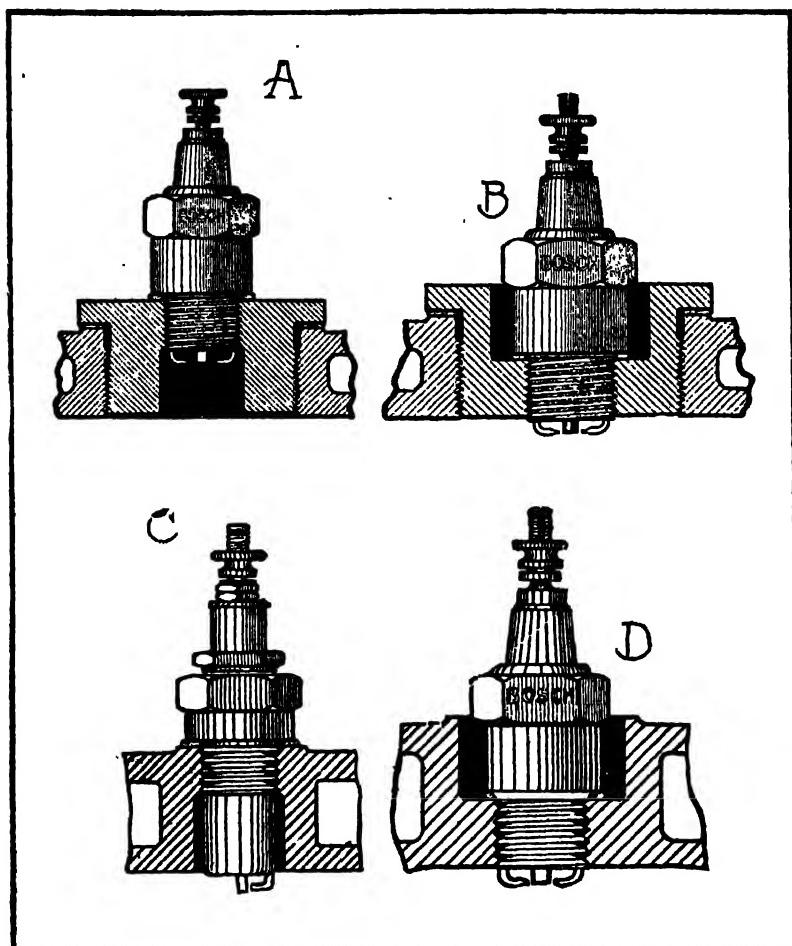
Illustrating Proper and Improper Methods of Spark Plug Installation.
